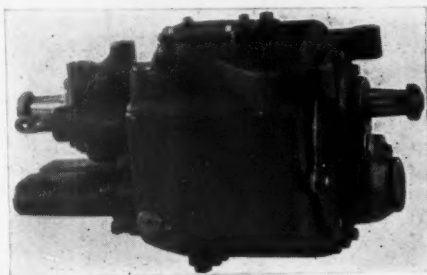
Details of the Campbell Transmission Gear Shifting Mechanism
